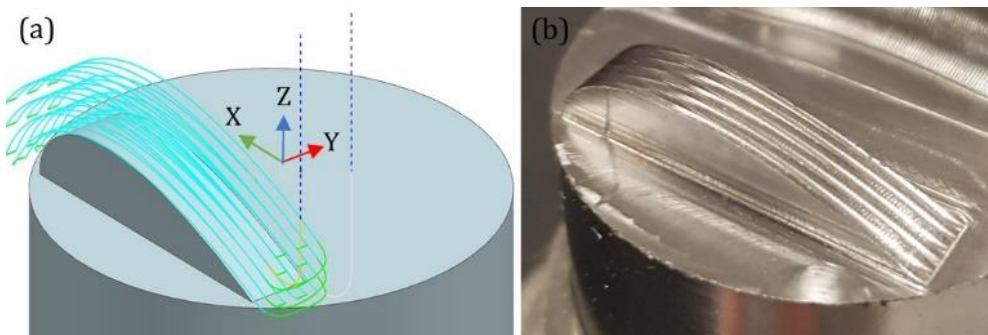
(a) Cutting tool path for an airfoil geometry, (b) Machined part.
